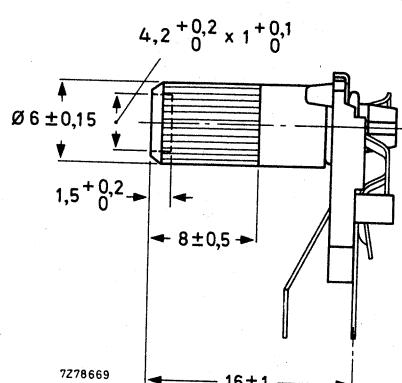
Test switch for vertical mounting, with adjustment knob at the side of the base plate.
